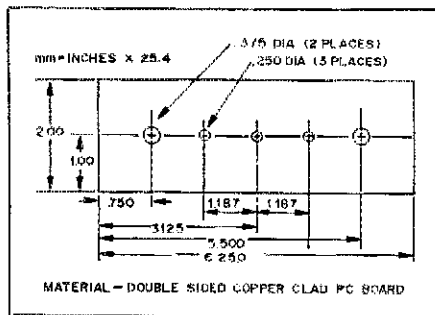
Pickup box side plate. The large holes are for positioning the box constant tabs.
